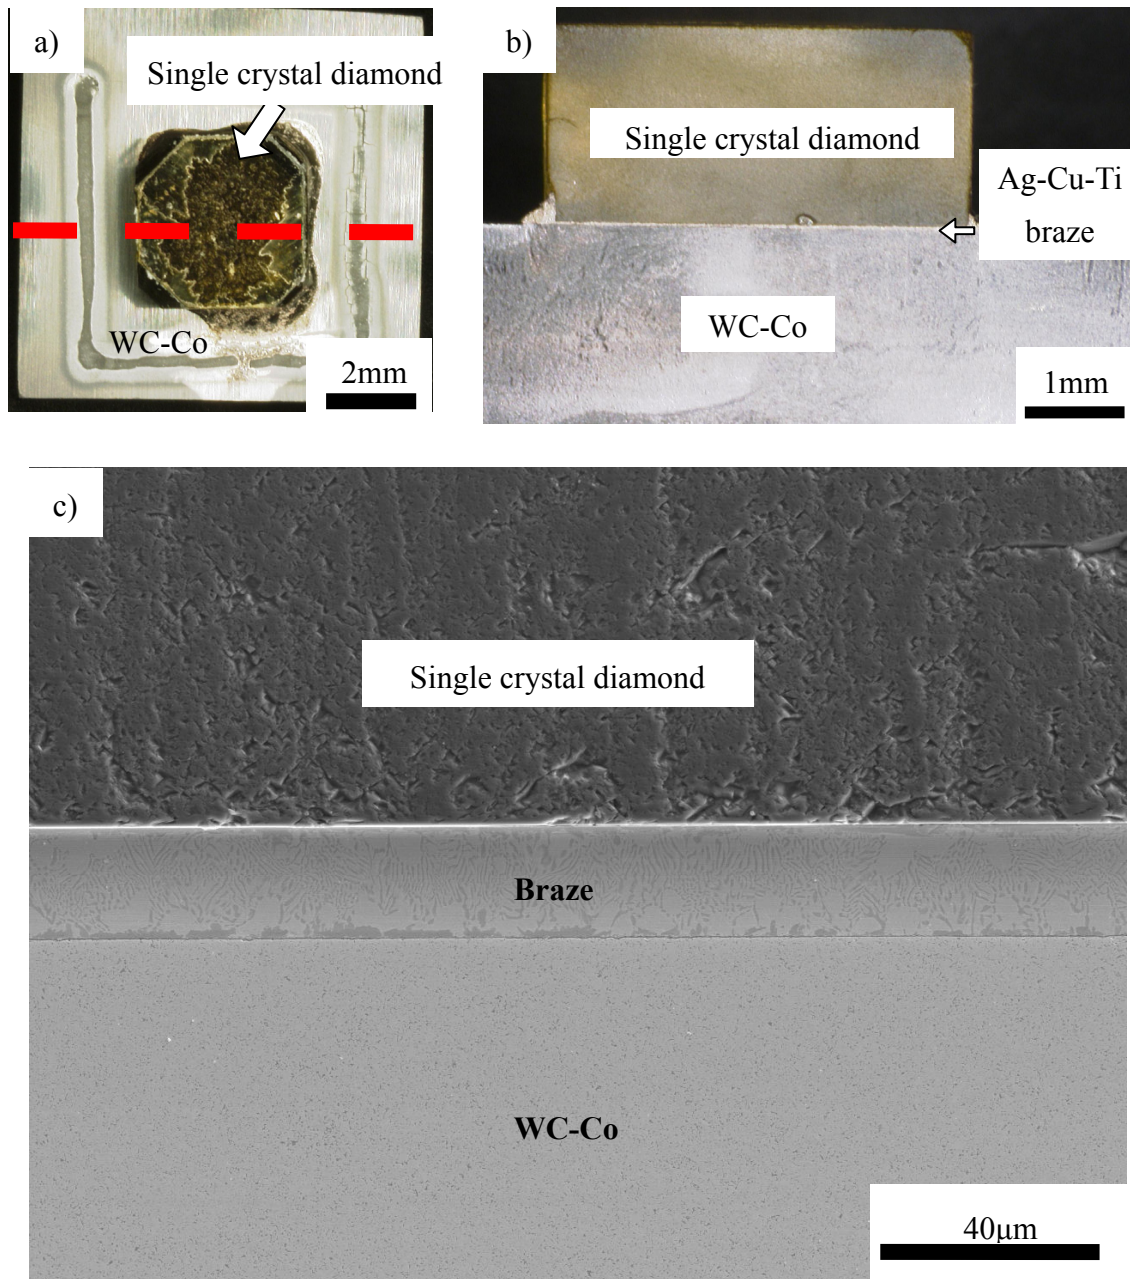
The cutting of a single crystal diamond specimen using ultrasonic cutter.
